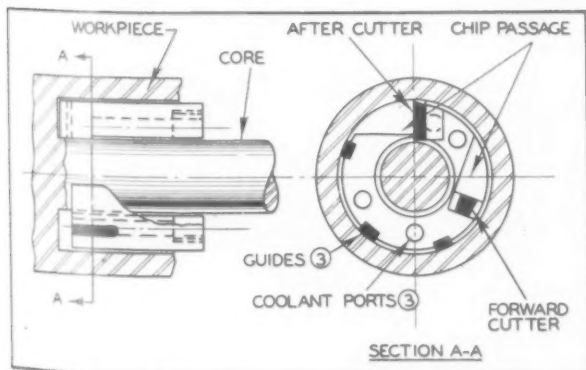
shows the general arrangement for a deep hole boring tool head. It is to be noted that in most cases in deep hole treatment, where the workpiece is symmetrical, the workpiece is rotated while the tool remains stationary. However, the above principle of boring can be adapted to the boring of parts which cannot be rotated and where the tool is rotated. The control of the chips remains the same.
